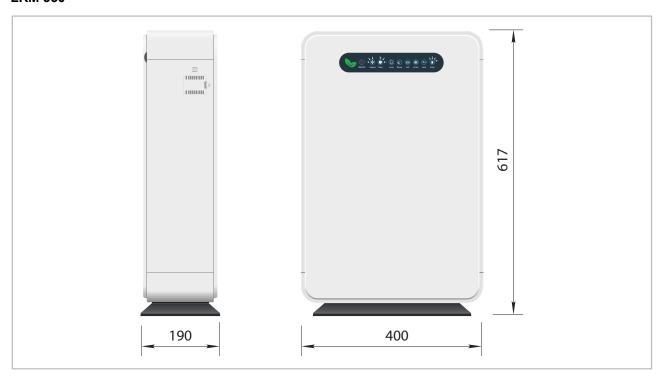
Unit dimensions LRM 350 (all measurements in mm)
